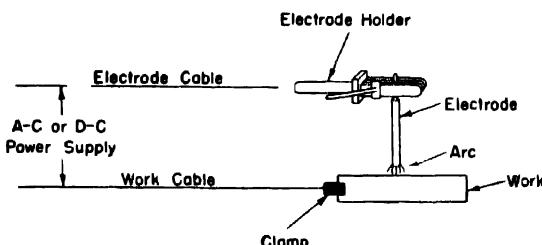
Elementary diagram of circuit components for metal arc welding. The power may be supplied by an a-c "stepdown" transformer, a d-c welding generator, or a d-c constant-potential generator and resistors.
